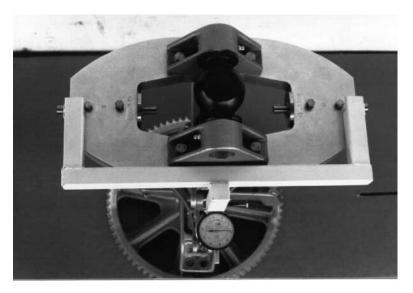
PROPER PLACEMENT OF HUB FIXTURE
